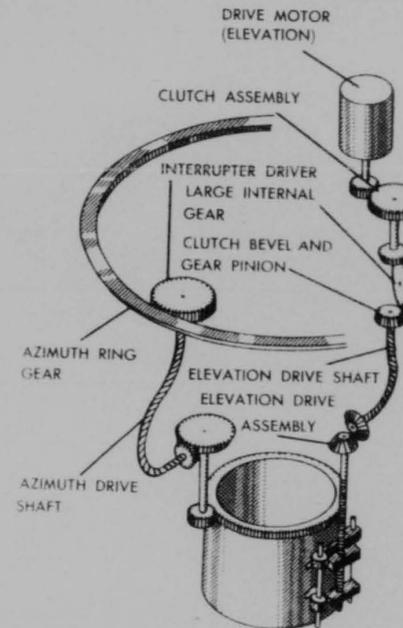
Schematic Drawing of Interrupter Drive Assembly.
